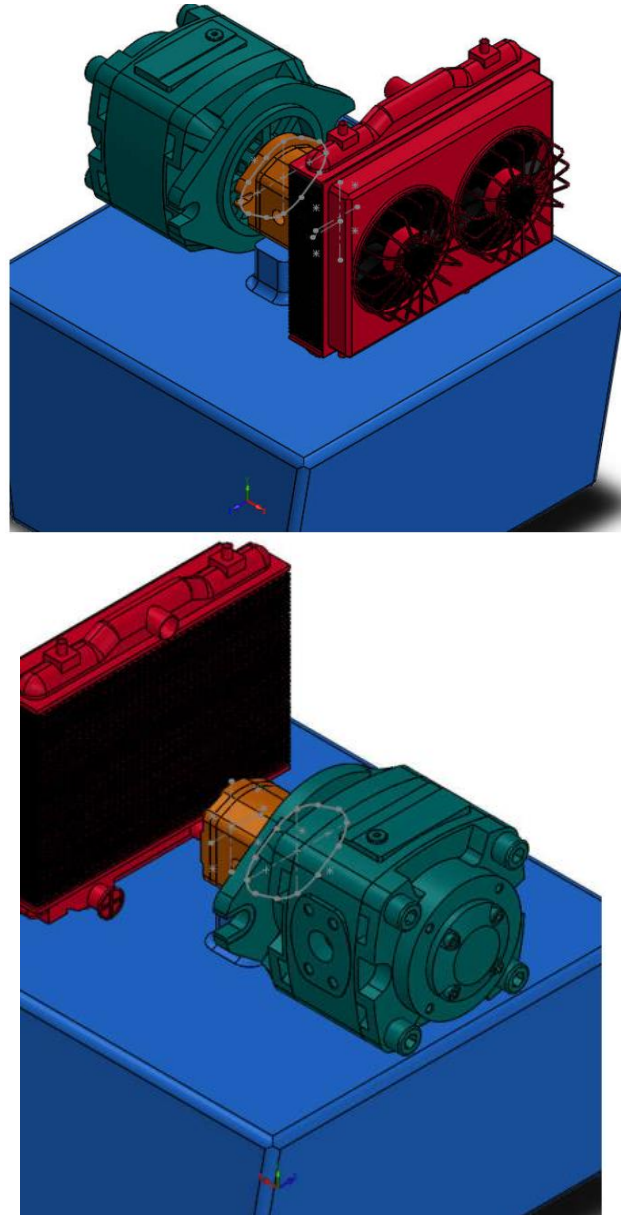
Cooler Incorporated in Pump motor assembly for the new model
